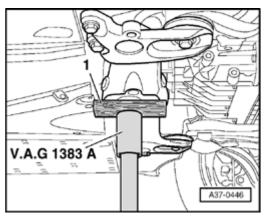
Removing VAG1359/2 Universal Mount From VAG1383A Engine/Transmission Jack And Inserting Piece Of Wood Instead
